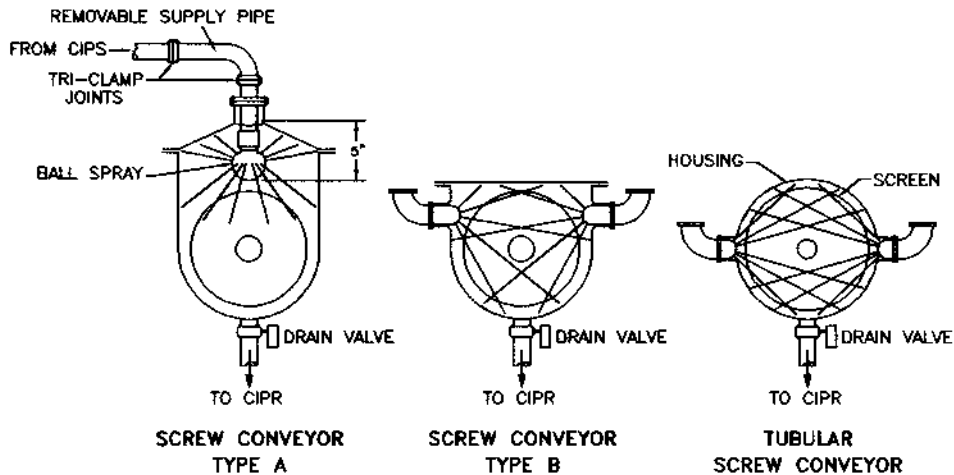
The installation of spray devices in screw conveyors, blanchers, and similar equipment items must give consideration to headspace and clearance requirements.
